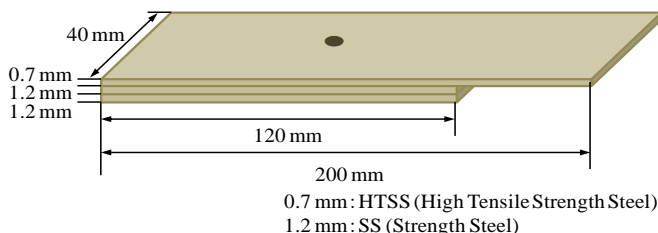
The test sample of spot-welded three-steel sheet.
